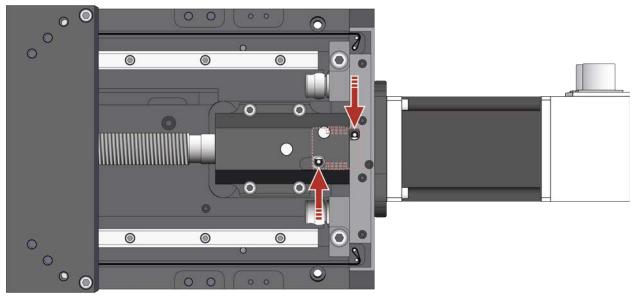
Tighten the Shaft Coupling to the Drive Screw
